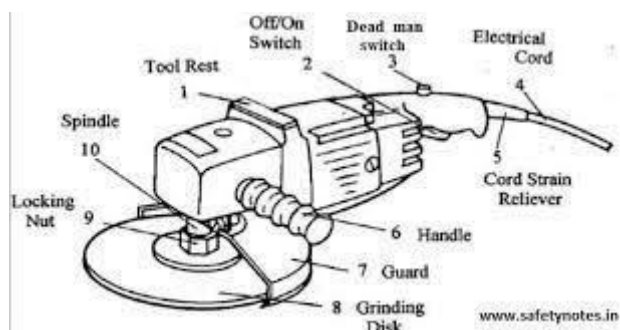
Grinding Machine (Grinding Technology, n.d.)
